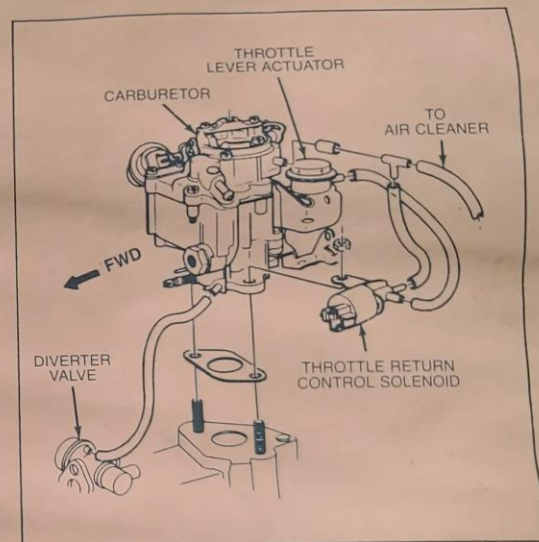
Throttle Return Control Solenoid Valve Location (4.8L Gasoline Engine)
